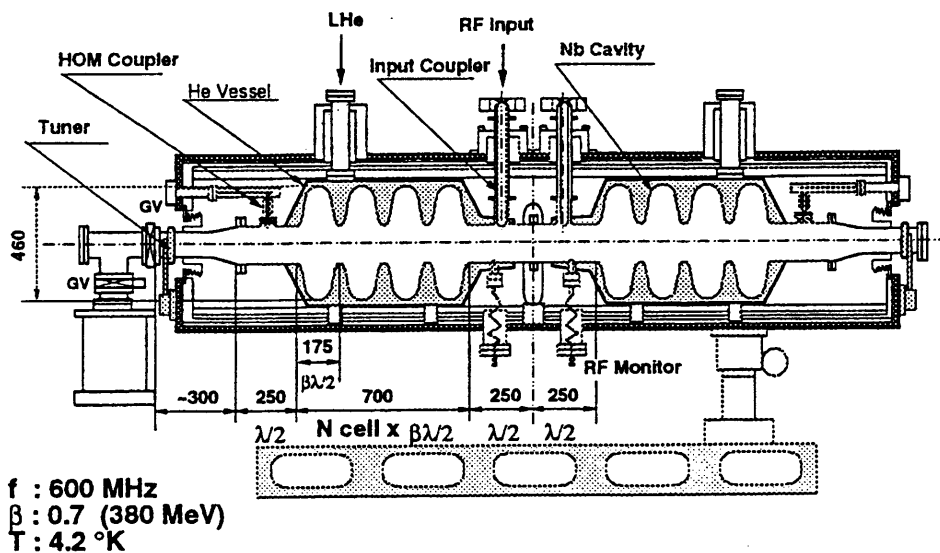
A Conceptual Drawing of the Proton Accelerator Superconducting Cavity and Cryomodule
